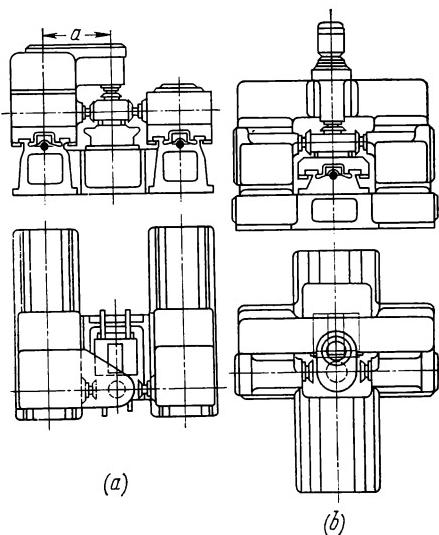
Milling machines operating with (a) cutter feed and (b) workpiece feed
